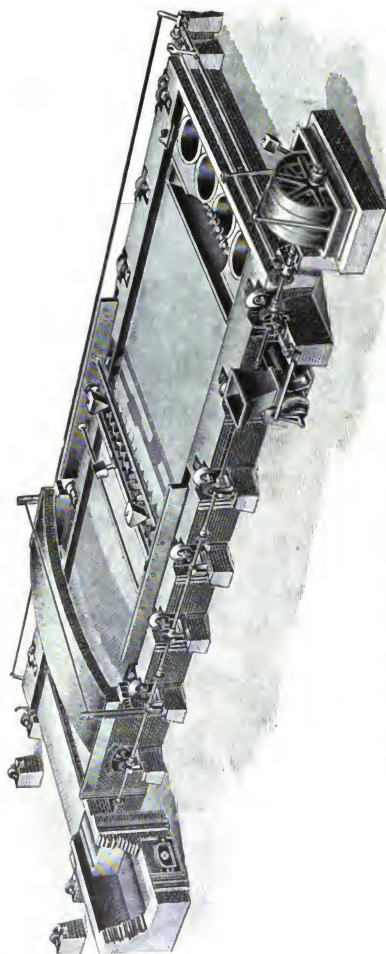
THE DAVIS ROASTING FURNACE. (F. M. Davis Iron Works Co., Denver, Col.)
